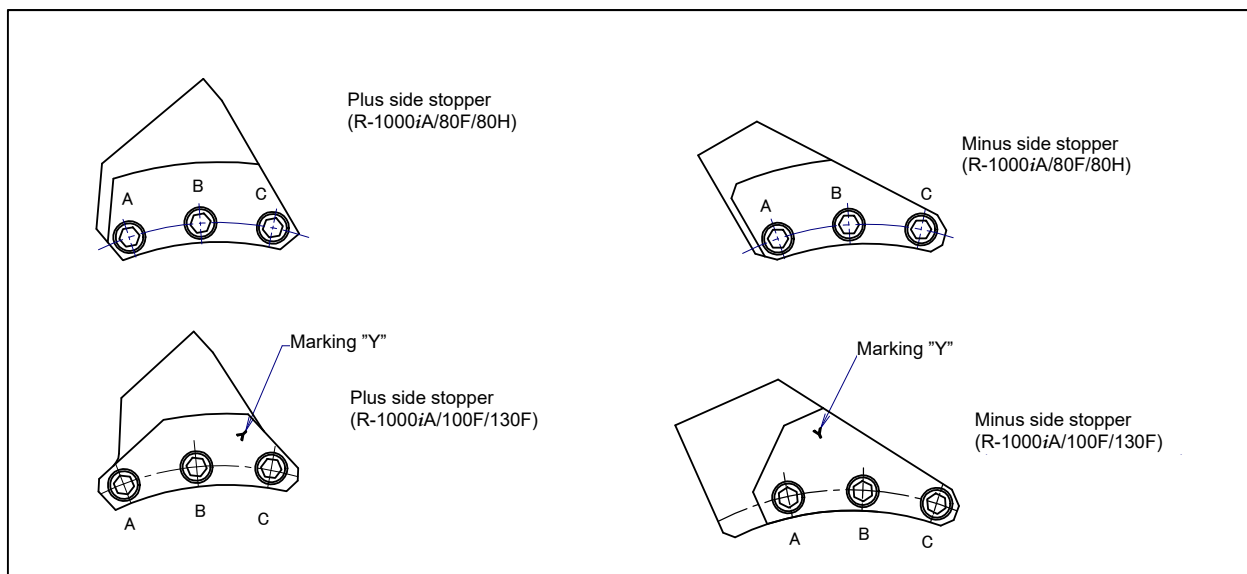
(a) Mounting the J1-axis mechanical adjustable Stopper (Option)
